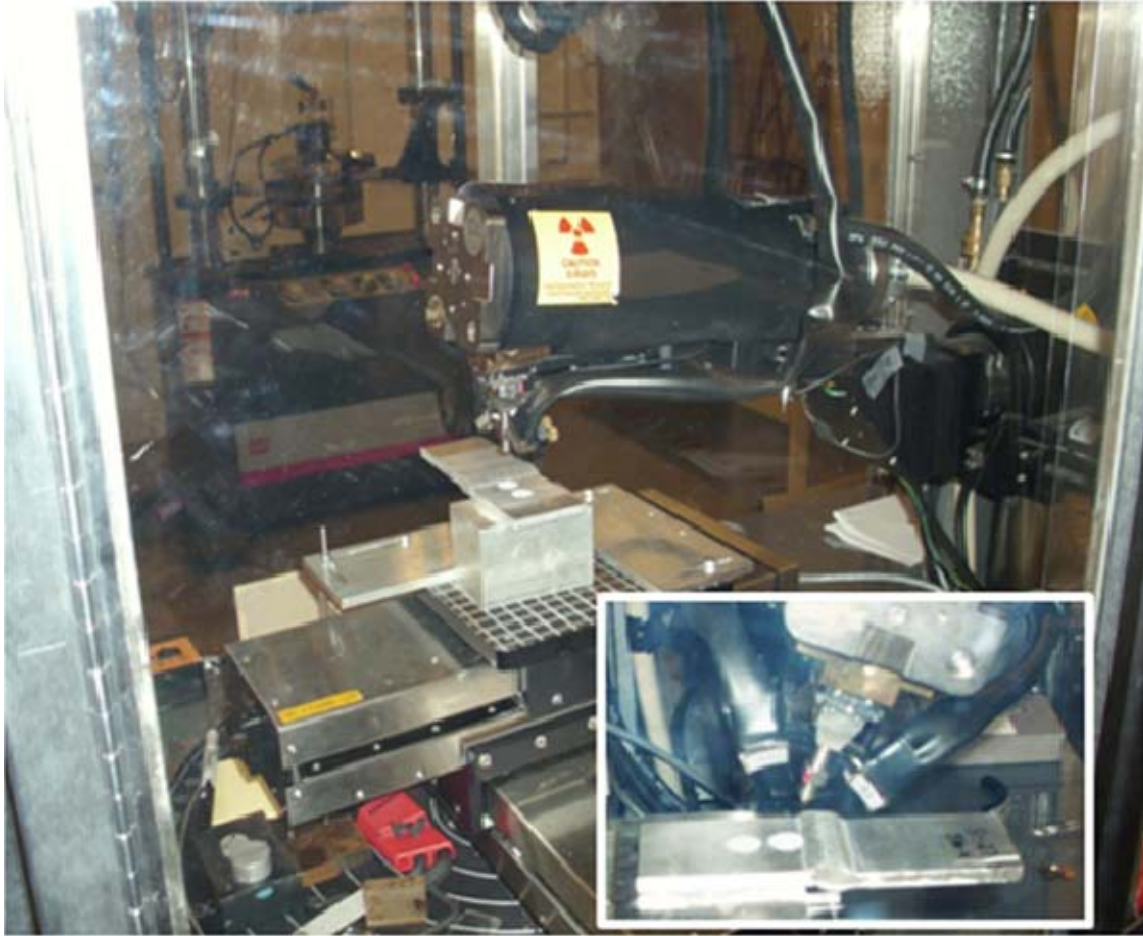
LXRD module measuring lab welded specimen. From [26].
